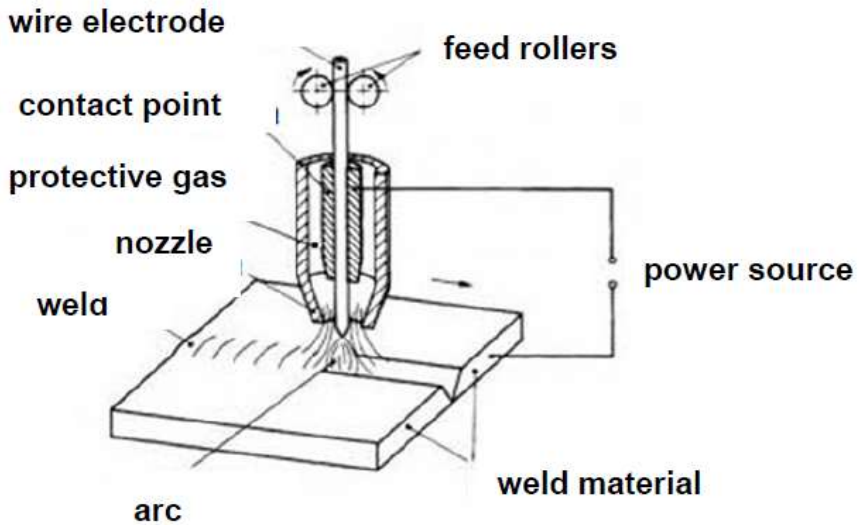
Schematic presentation of the used welding technology (Krivošik, 2006)
